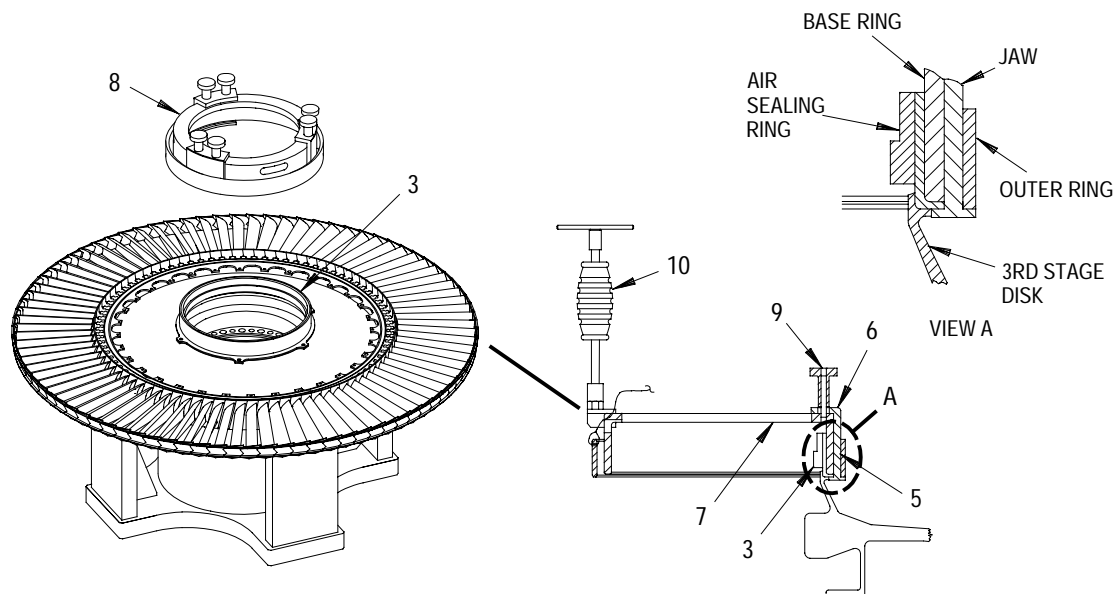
Third Stage Turbine Air Seal - Removal (Sheet 2 of 2)
